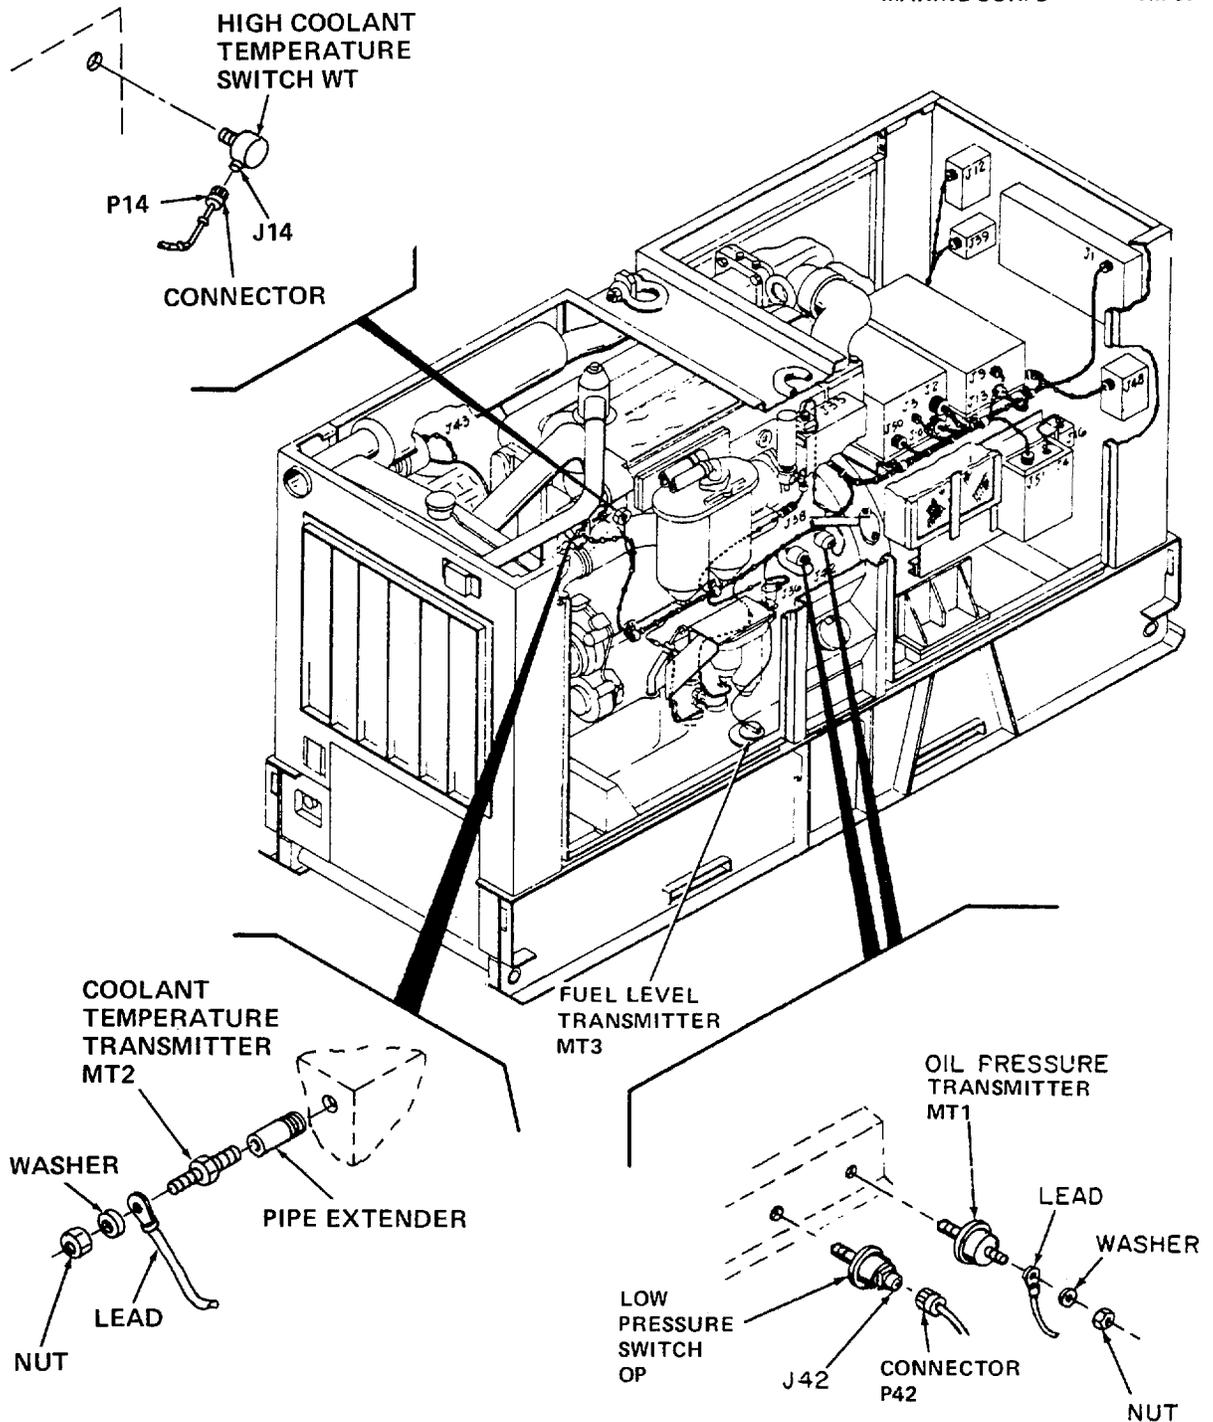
Engine Electrical Control Elements, Removal and Installation (Sheet 1 of 2)
